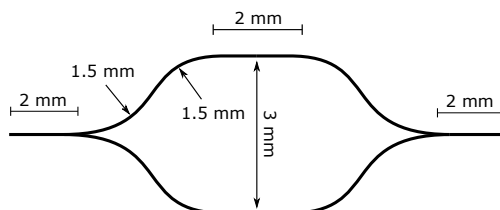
Detail of lenticular cross-section with flat top and bottom used in the strip, with its relevant dimensions.
